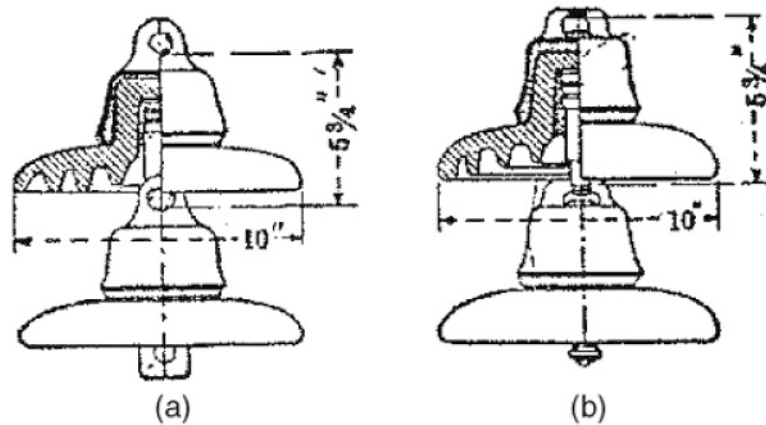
Insulator string: (a) clevis type, (b) ball-and-socket type.
